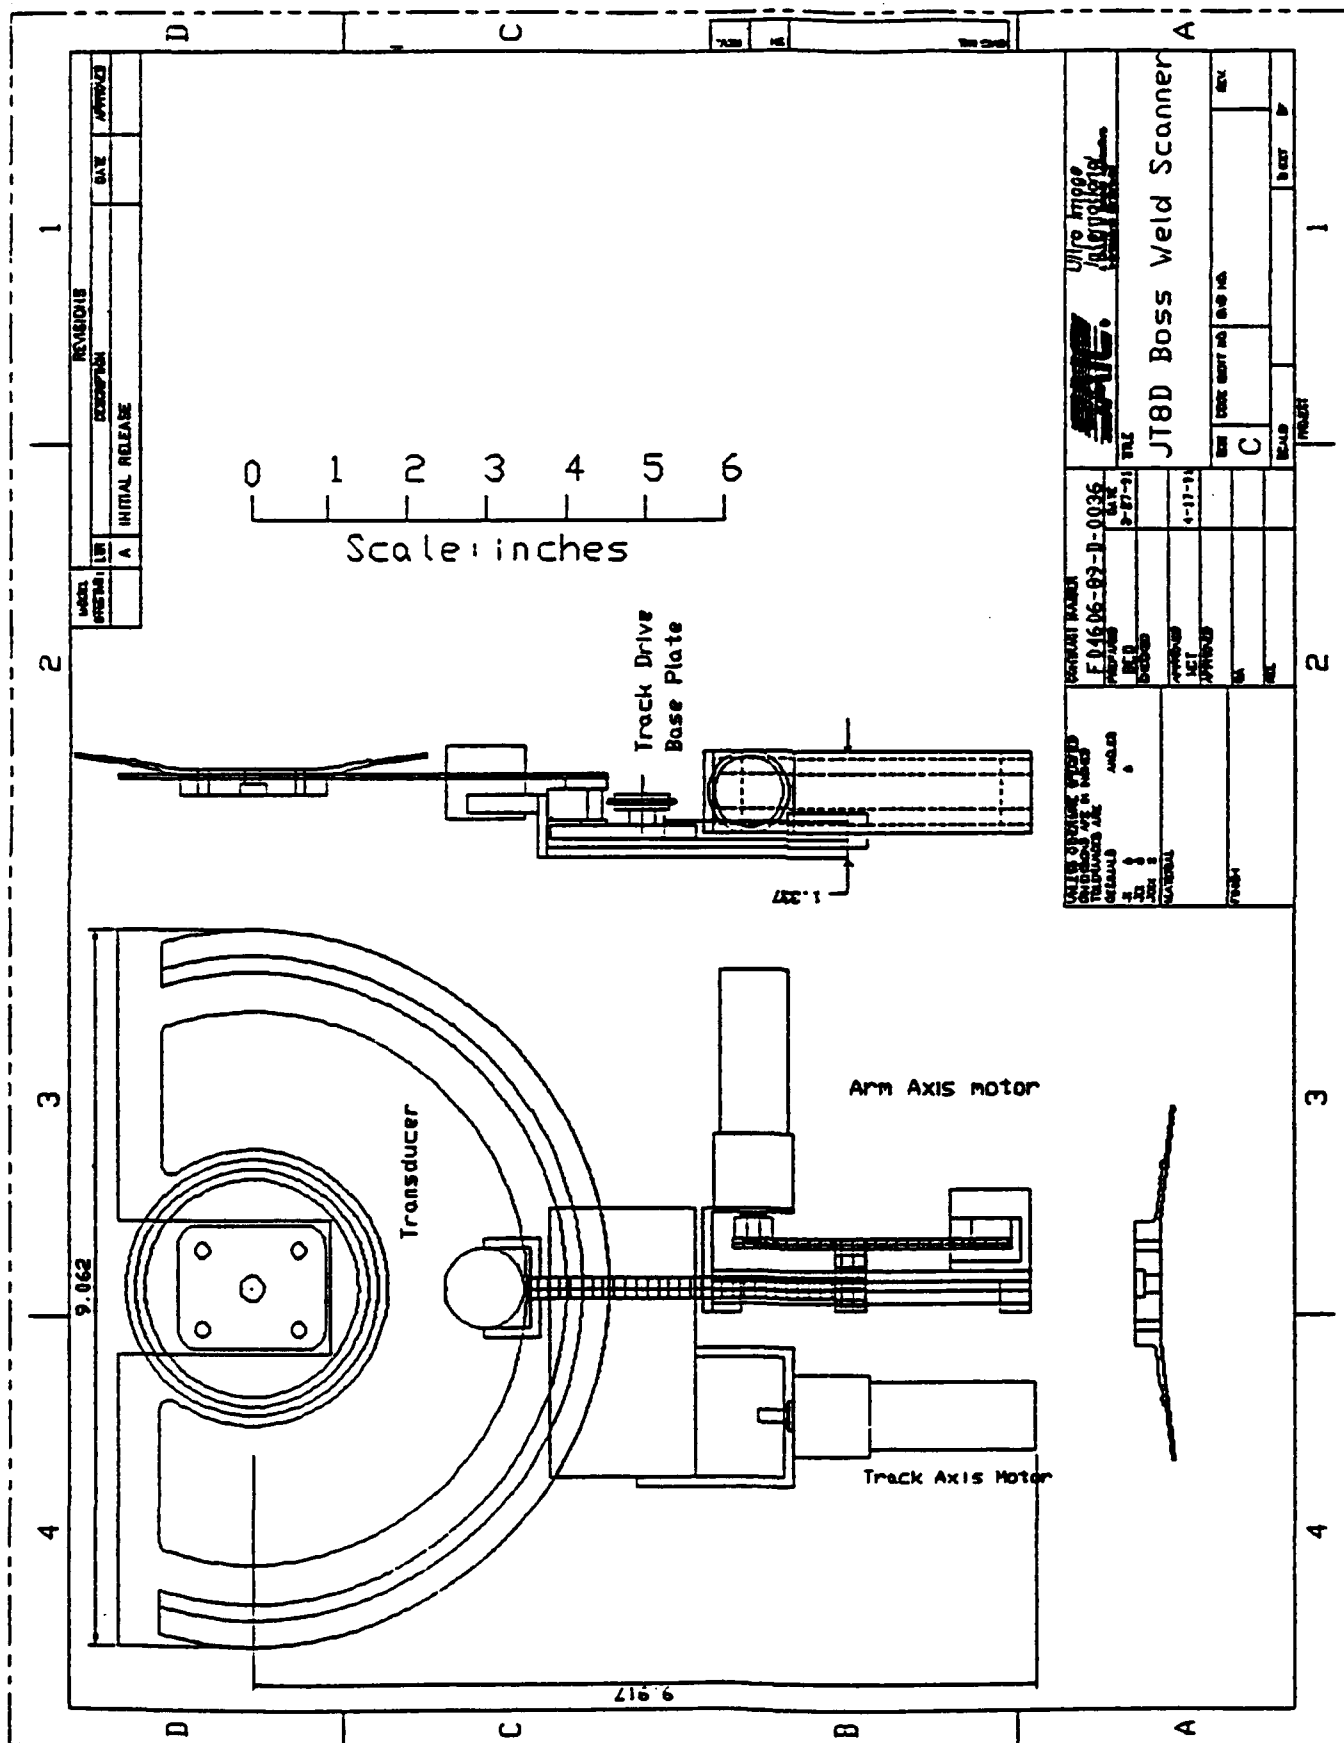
SCHEMATIC OF PROTOTYPE JT8D MOTORIZED BOSS WELD SCANNER
